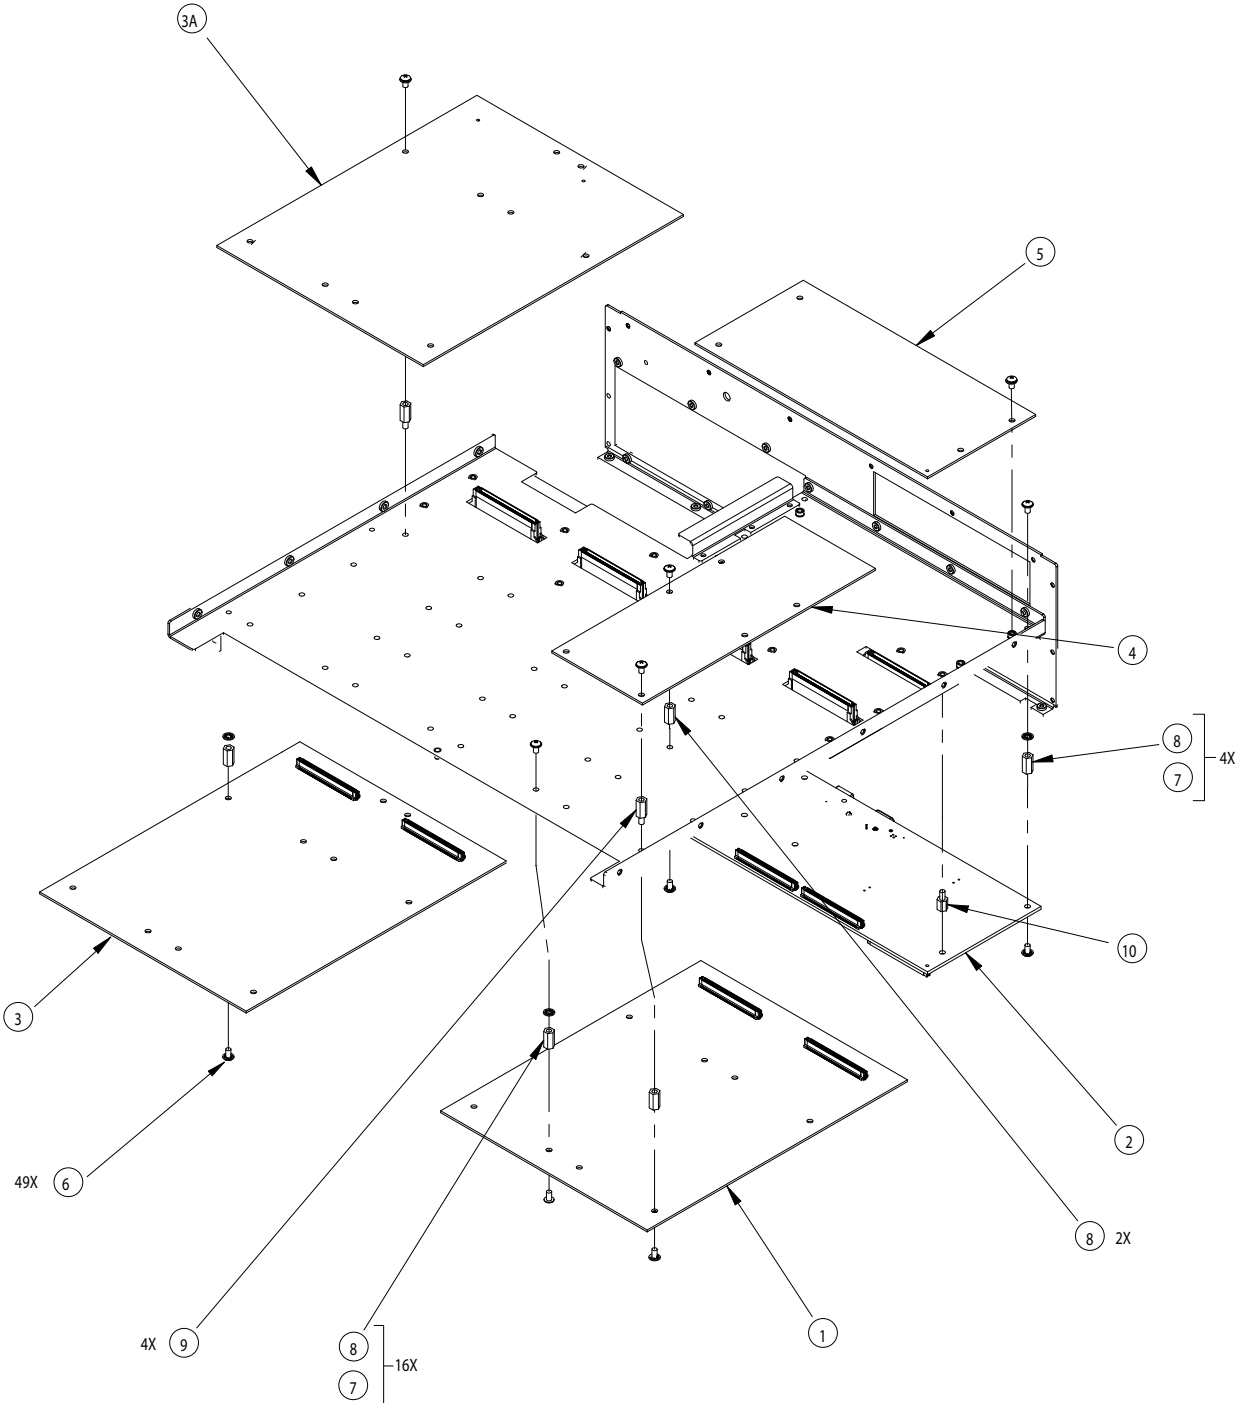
Circuit Boards (bottom view) (8-chan)
